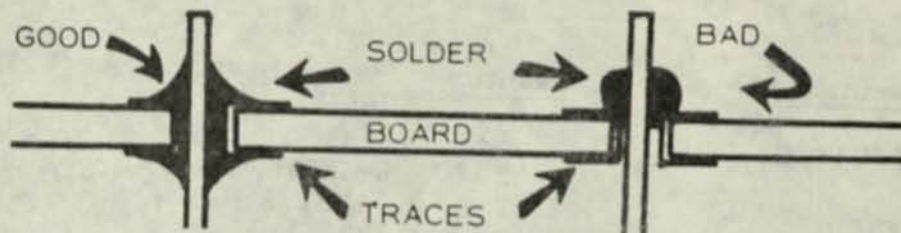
CROSS-SECTION OF A PC BOARD SHOWING GOOD AND BAD SOLDER CONNECTIONS
